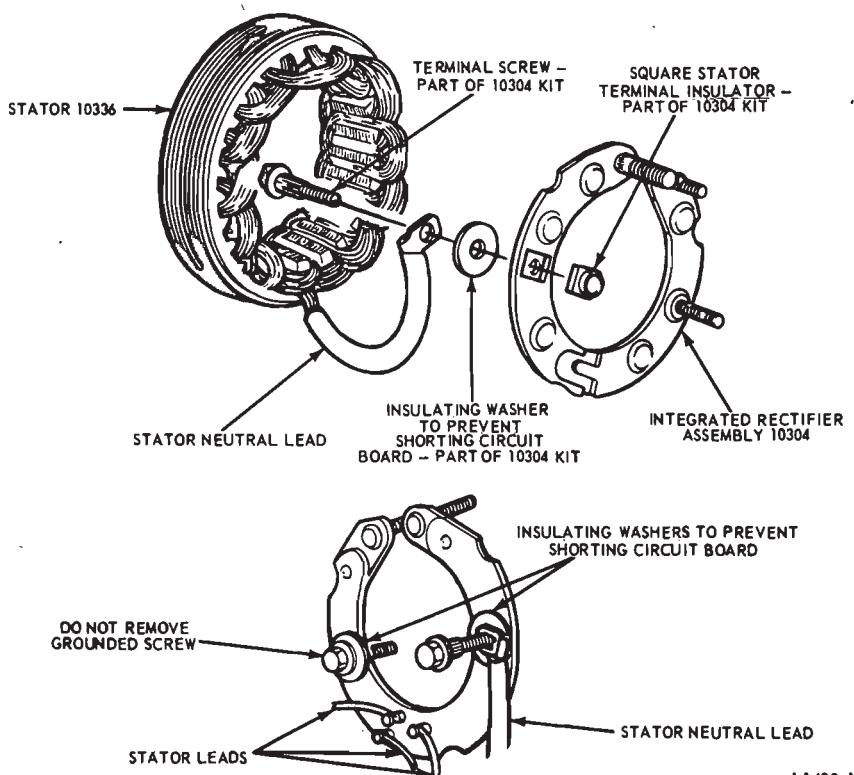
Stator Terminal Installation—Fiber—Glass Circuit Board
